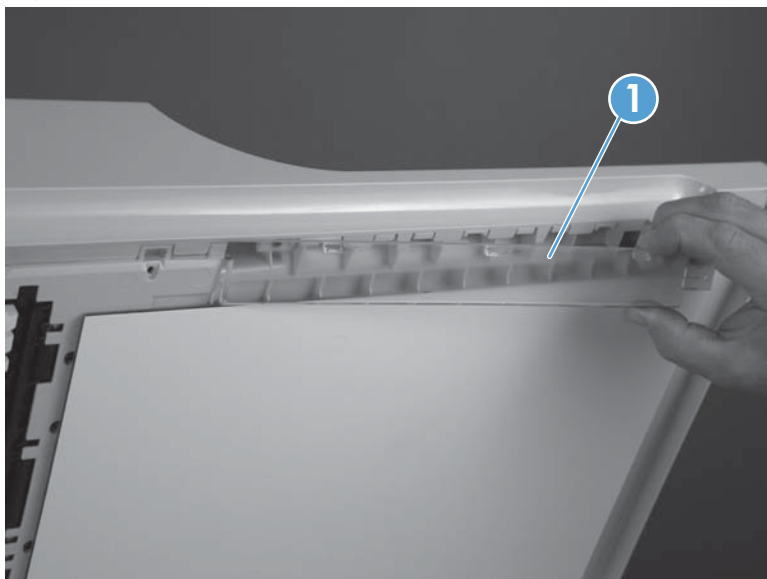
Remove the document feeder front cover (1 of 8)
